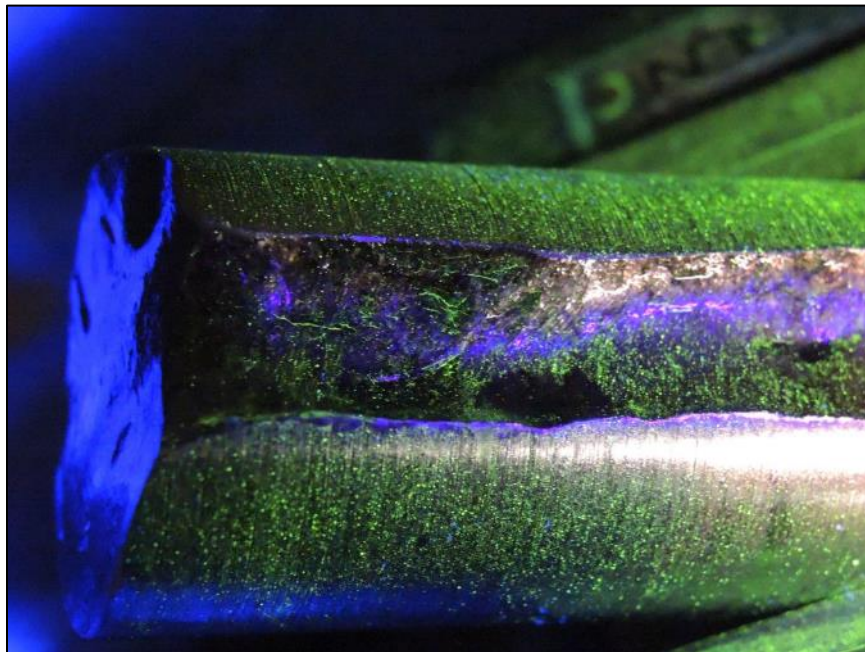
Representative image of the flange weld access hole surface of core sample D-NW following wet fluorescent magnetic particle testing showing microcracks.
